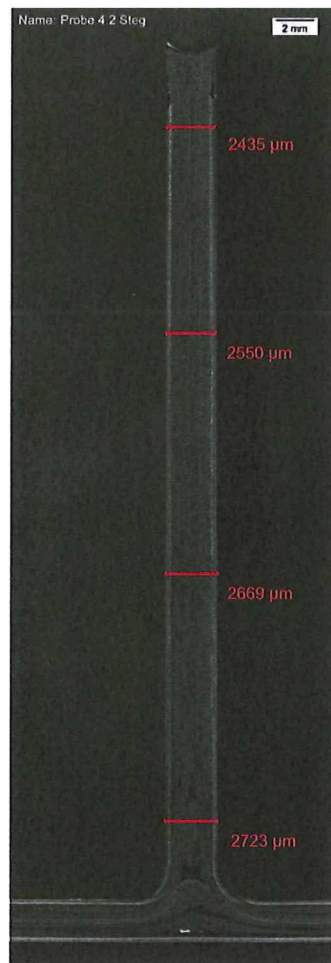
Cross section of panel 13.1 stringer 2 skin
